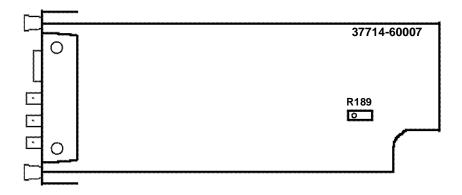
Unstructured PDH Assembly Adjustable Components
